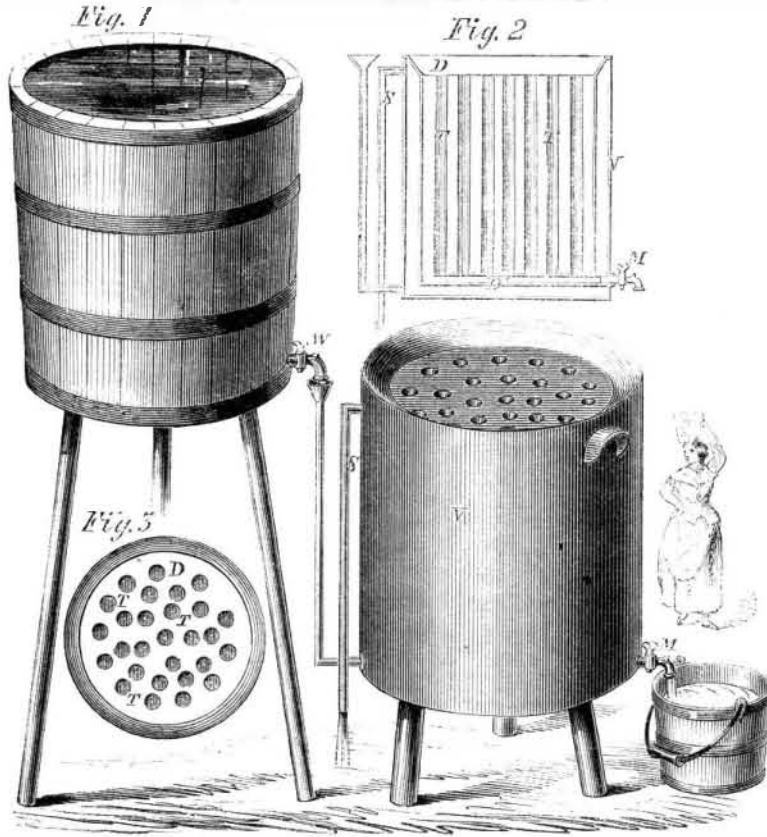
is a perspective view of the whole arrangement, Fig. 2 is a section of the cooler, and Fig. 3 a plan or top view of the same.
